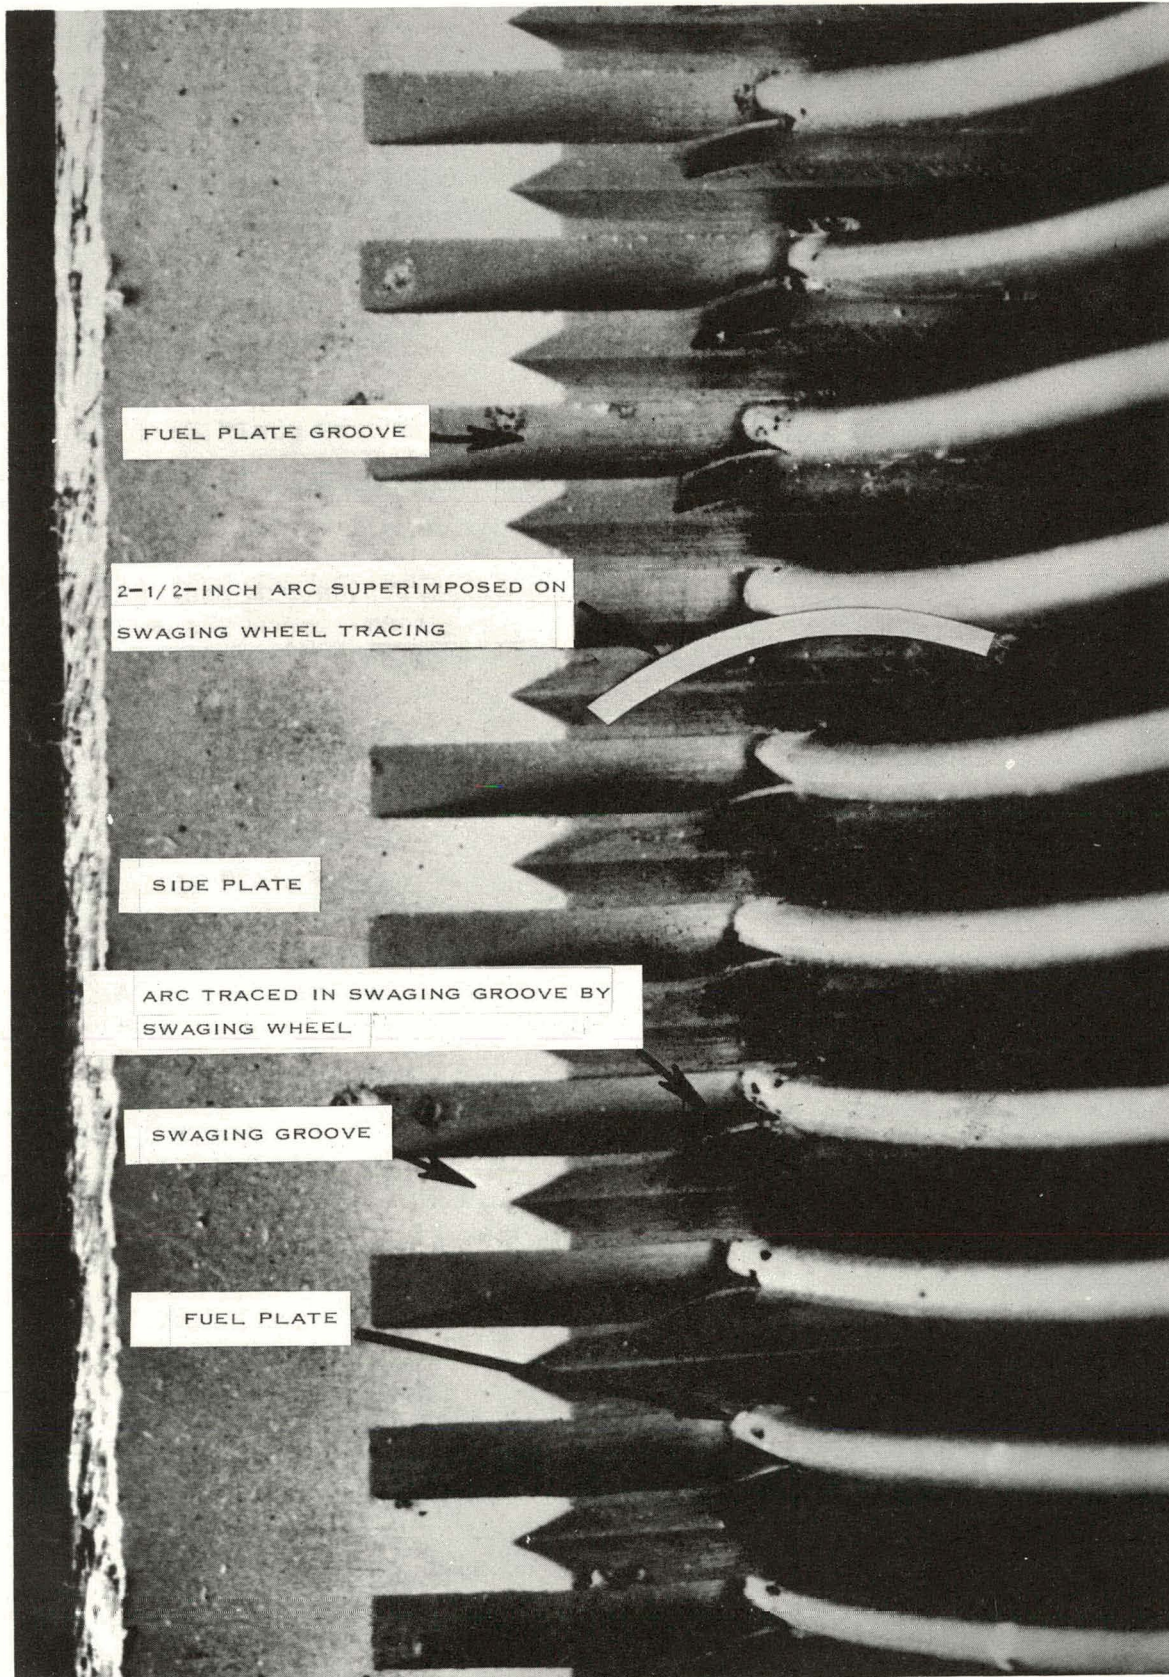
Photograph taken through roll-swaged element coolant channels after removal of end box.
